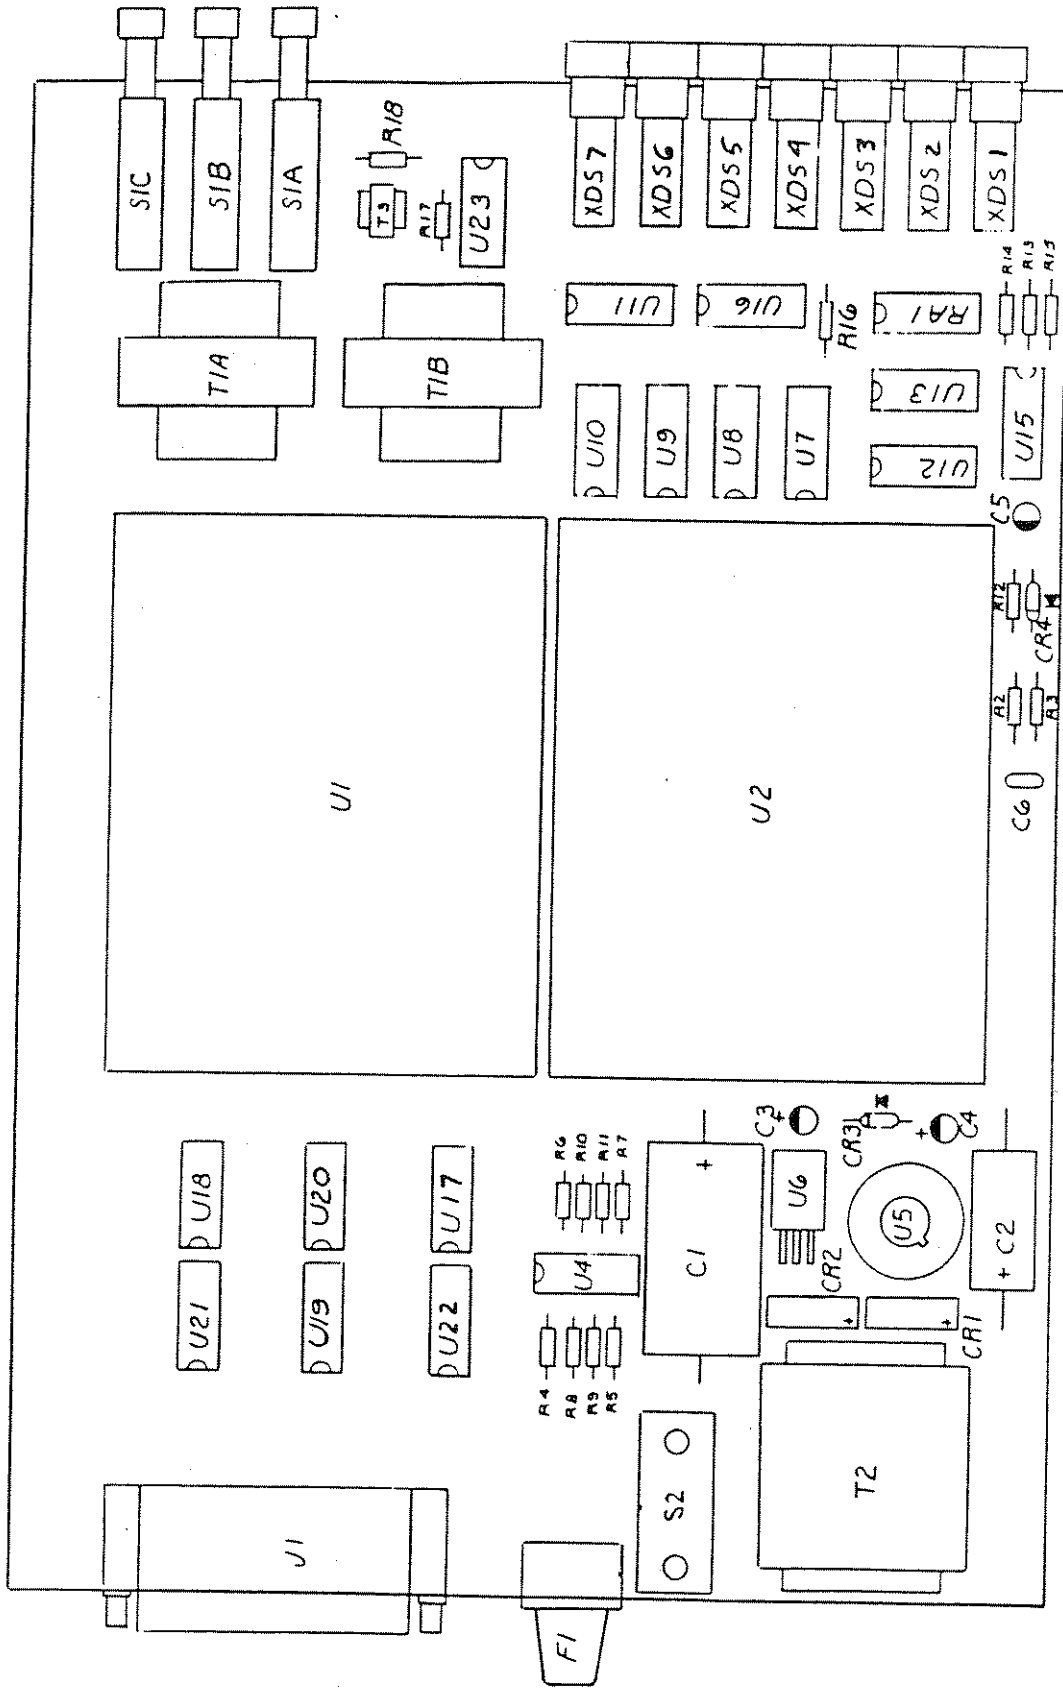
SR-203 Converter Board (A27884-1) and HSR-203 Converter Board (A27884-2), Parts Location
